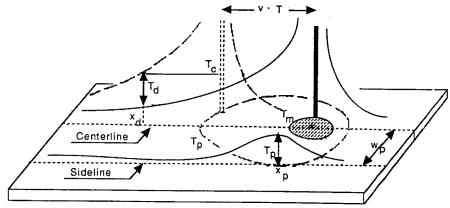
Definitions of the welding outputs T_p and T_d .
